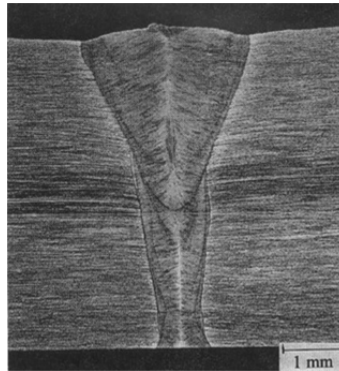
Optimum weld profile of type 347 stainless steel made using $P=5\text{kW}$, $S=2\text{m/min}$, $D_d=-0.4\text{mm}$.
